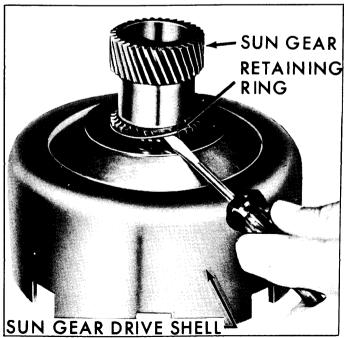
Removing Sun Gear Shell REar Retaining Ring
